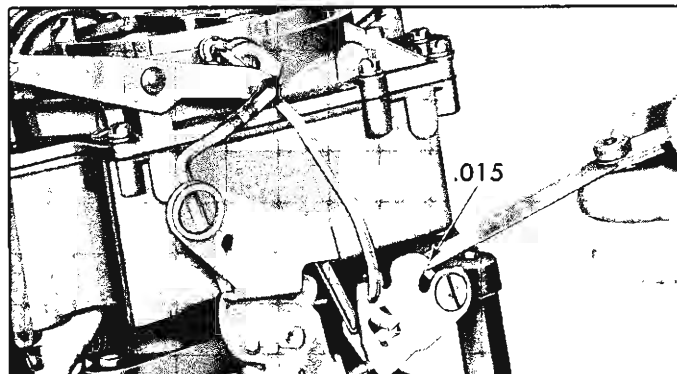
Checking Secondary Throttle Lockout Adjustment
